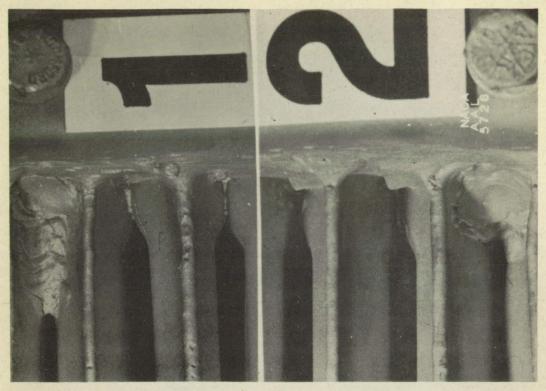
Left inboard heat exchanger after 100 hours of flight testing. Views showing gas-side cracks and shroud crack, C-46 airplane.
